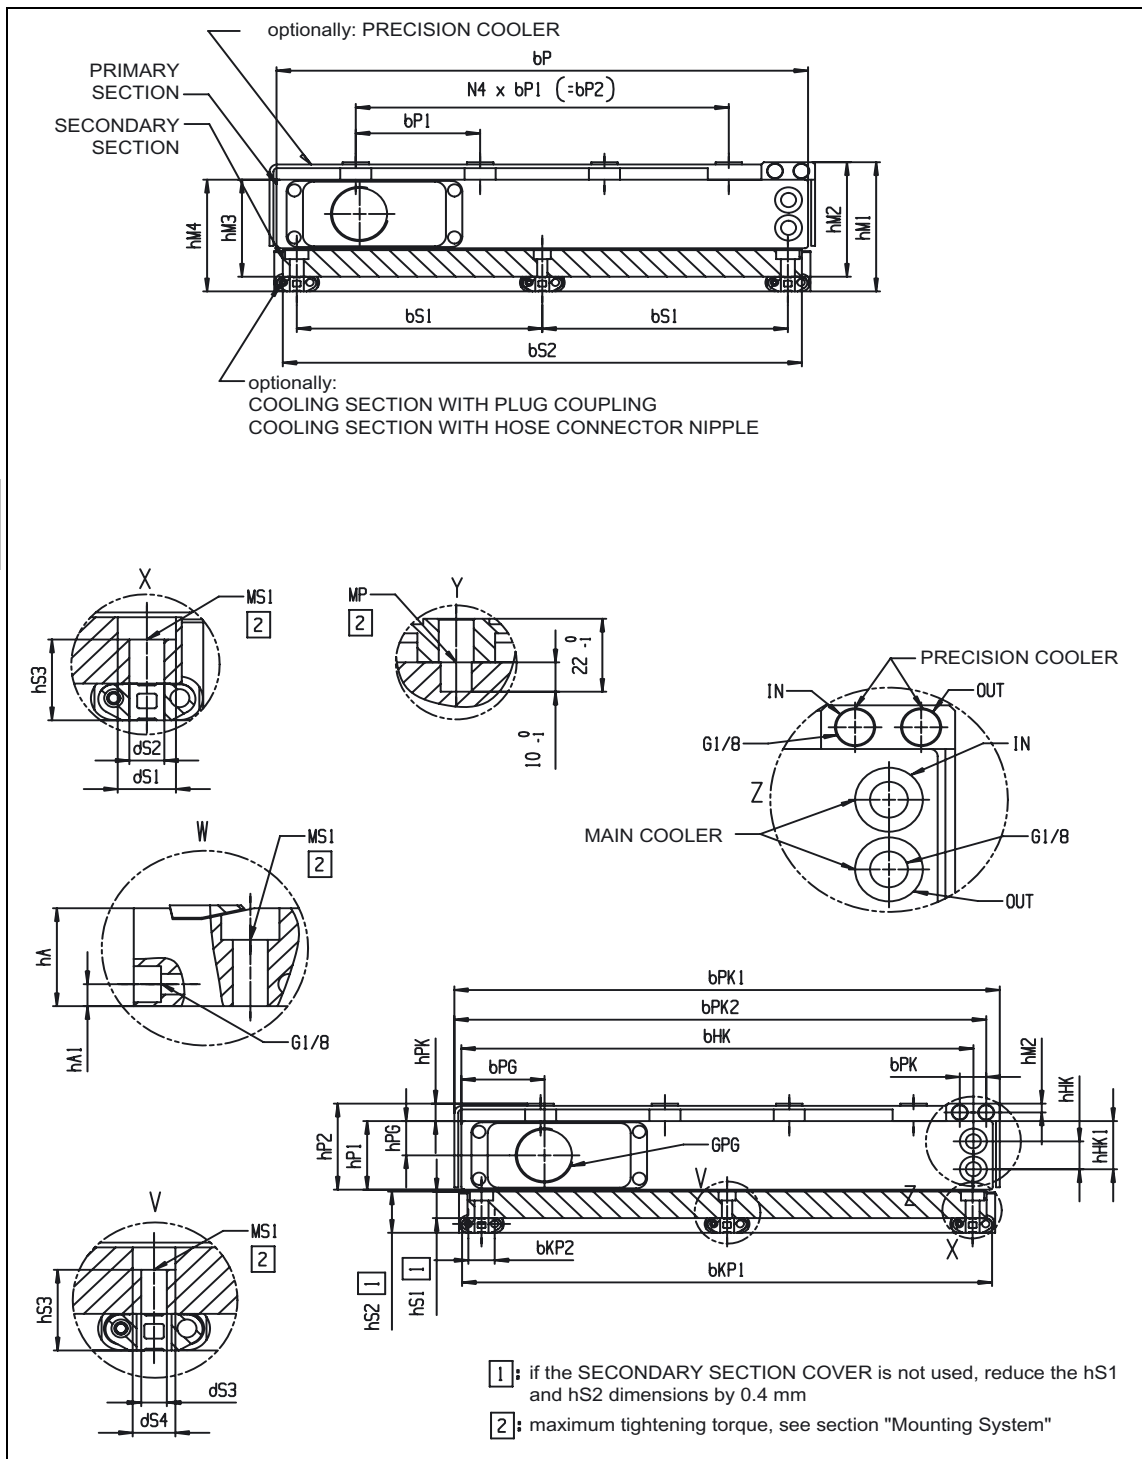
Mounting dimensions for the 1FN3900-4WB00 and 1FN3900-4WC00 motor models: Sections and details
